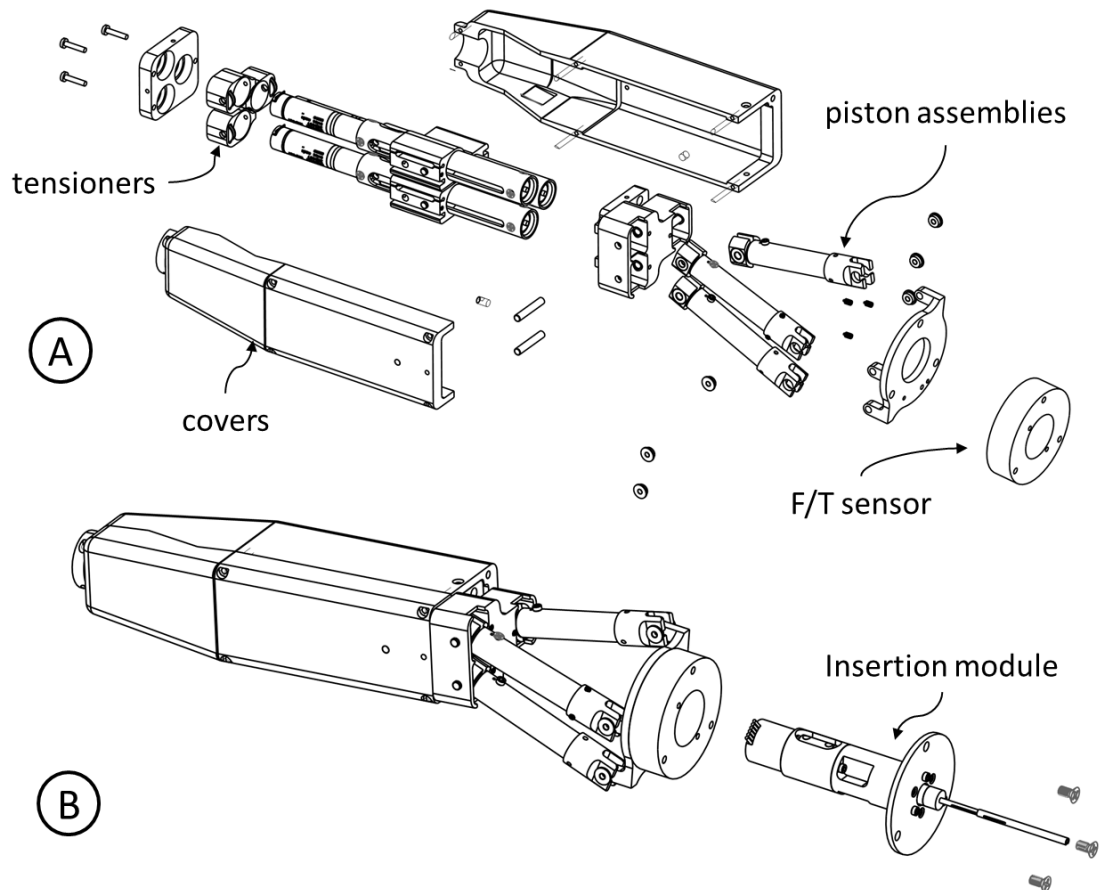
Prototype Insertion System Rendering. (A) An exploded view of the 3RPR planar manipulator. (B) The insertion module attaches to the robot through a 6 axis force/moment transducer.
